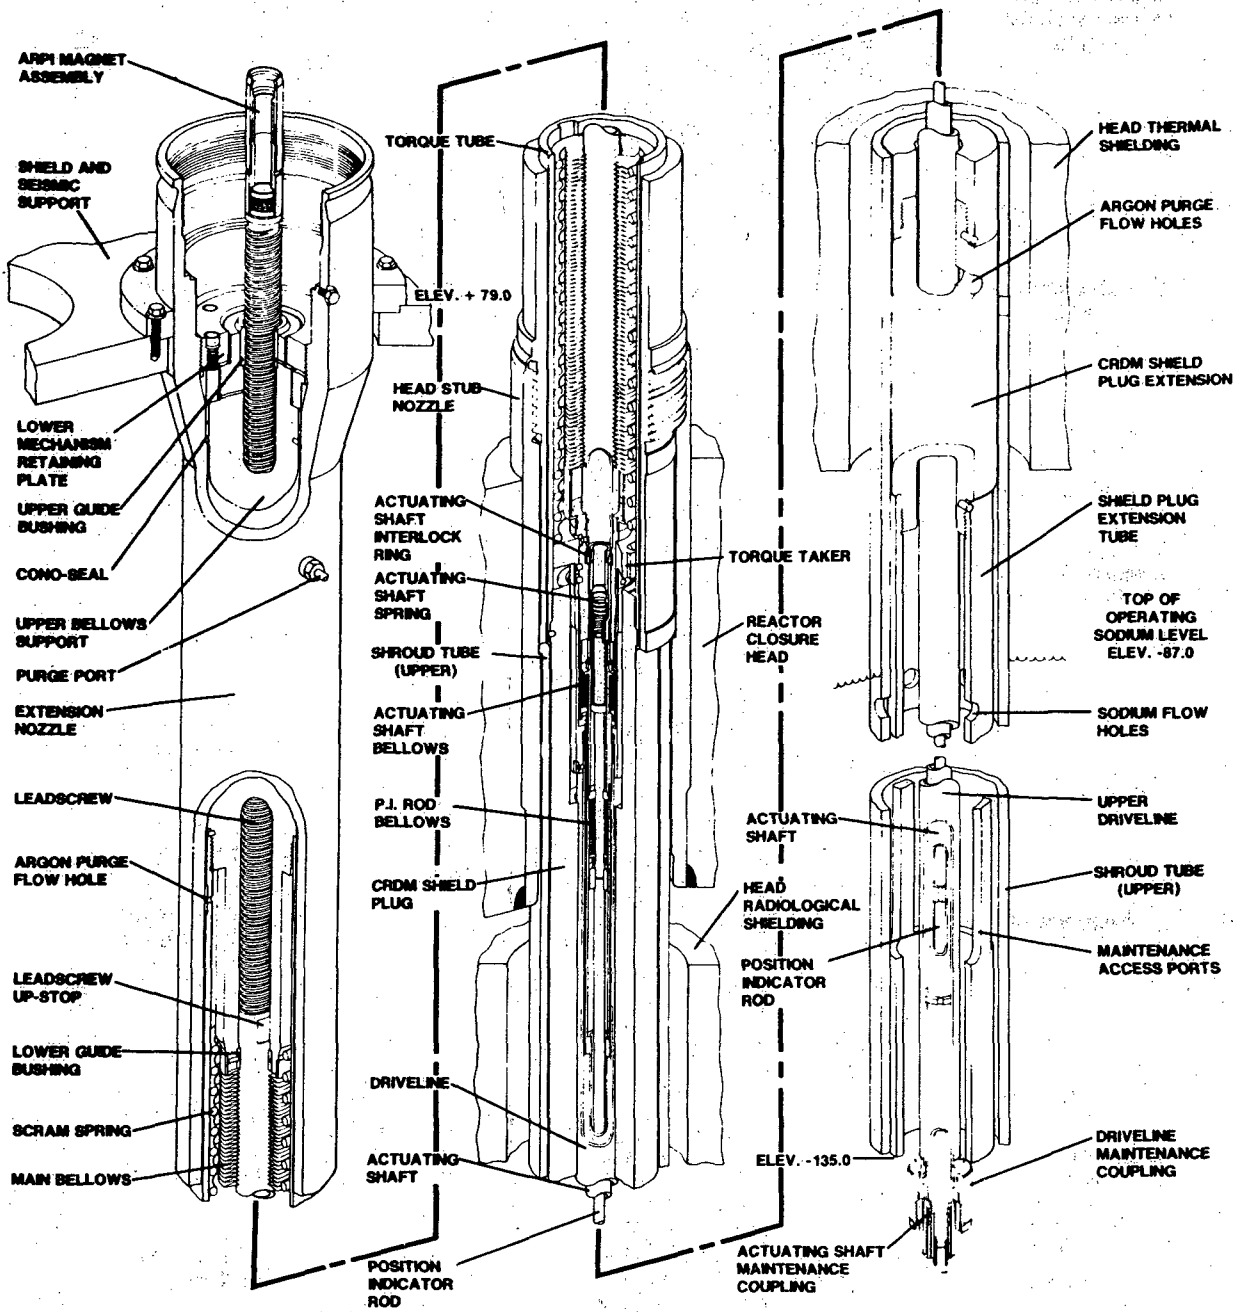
Lower CRDM Assembly, Extension Nozzle and Upper Shroud Tube
